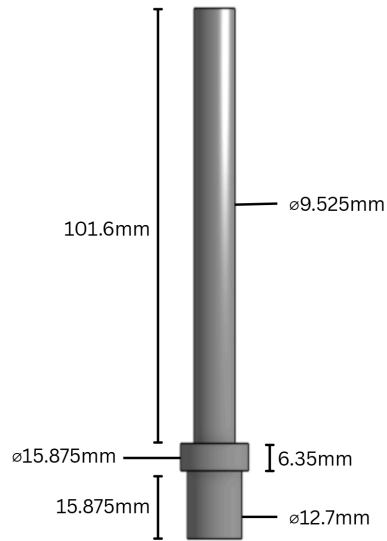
Dimensioned sample presser CAD design, fabricated out of PLA
